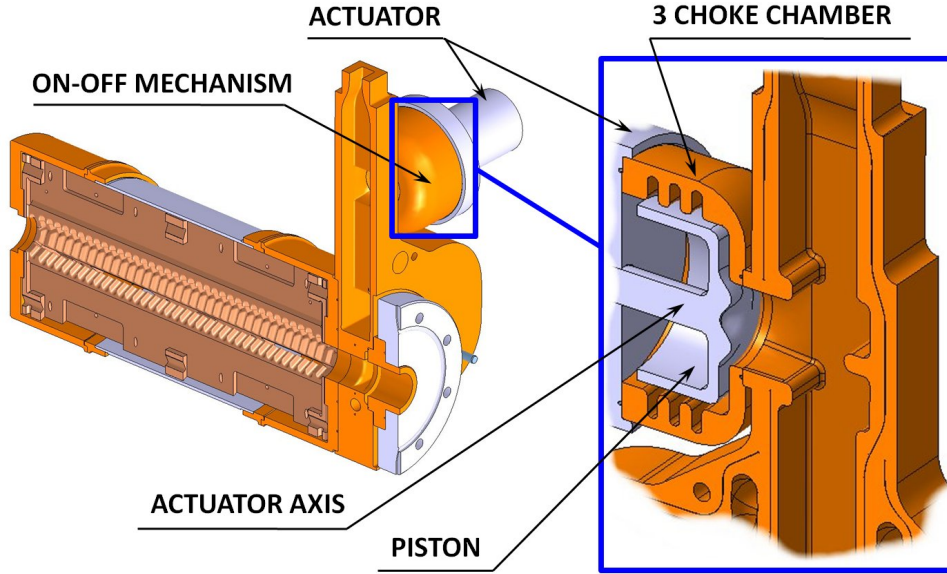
Closer view of the single PETS with details of the integrated ON/OFF mechanism
